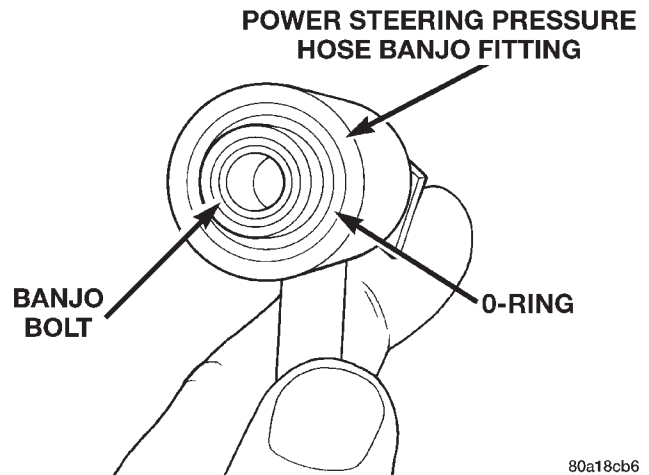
O-Ring Installed On Power Steering Hose Banjo Fitting
